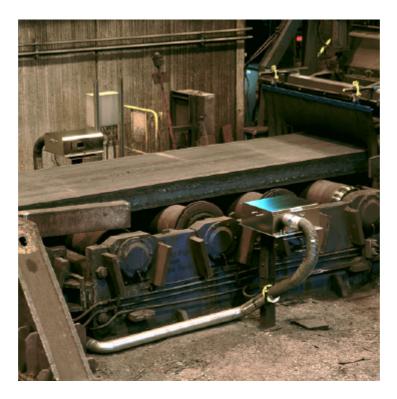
, Measurement installation in a Hot Strip Mill, prior to the re-heating furnace.
